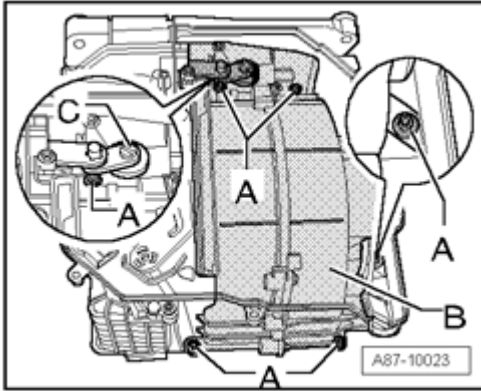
Identifying Bolts, Fresh Air Blower V2, And Connecting Elements
